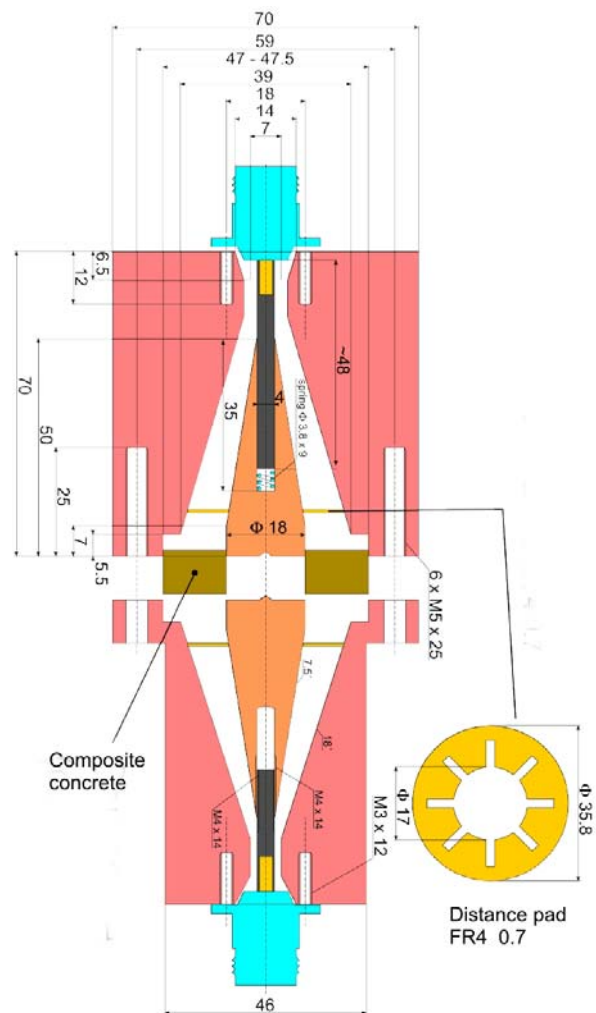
Basic dimension drawing of the circular flange (dimensions are given in mm).
